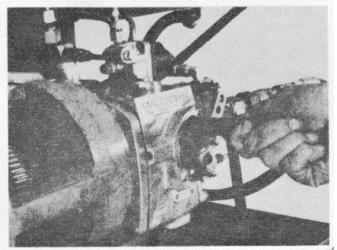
G-85. Adjusting No-Air Needle Valve NOTE
